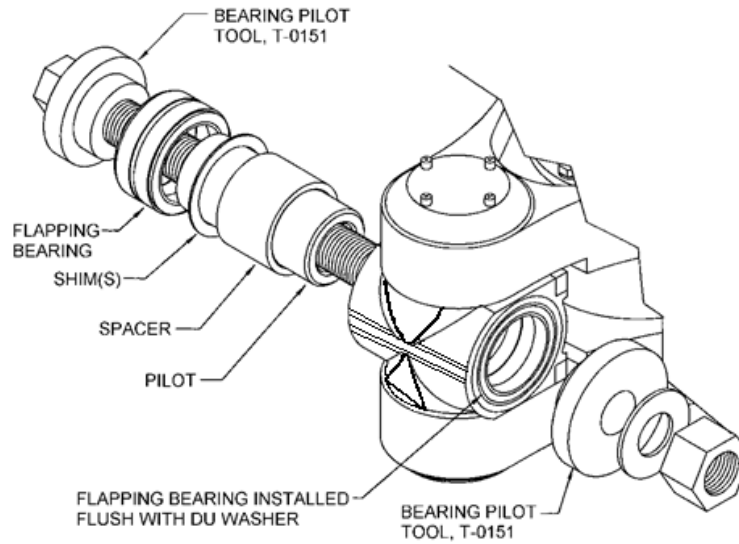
"Aft" Flapping Bearing and Spacer Installation
